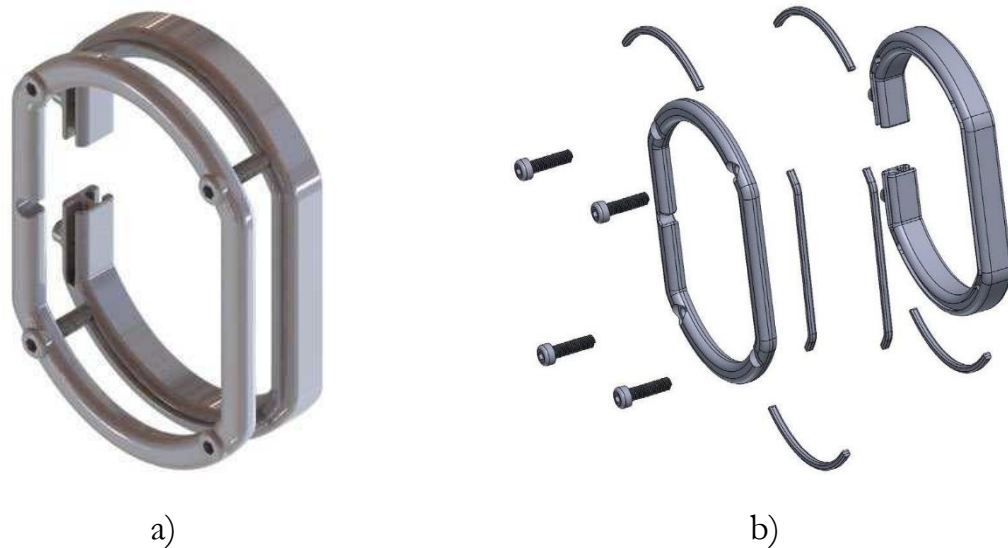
Representation of the angular adjustment system: a) Assembly; b) Exploded view.
